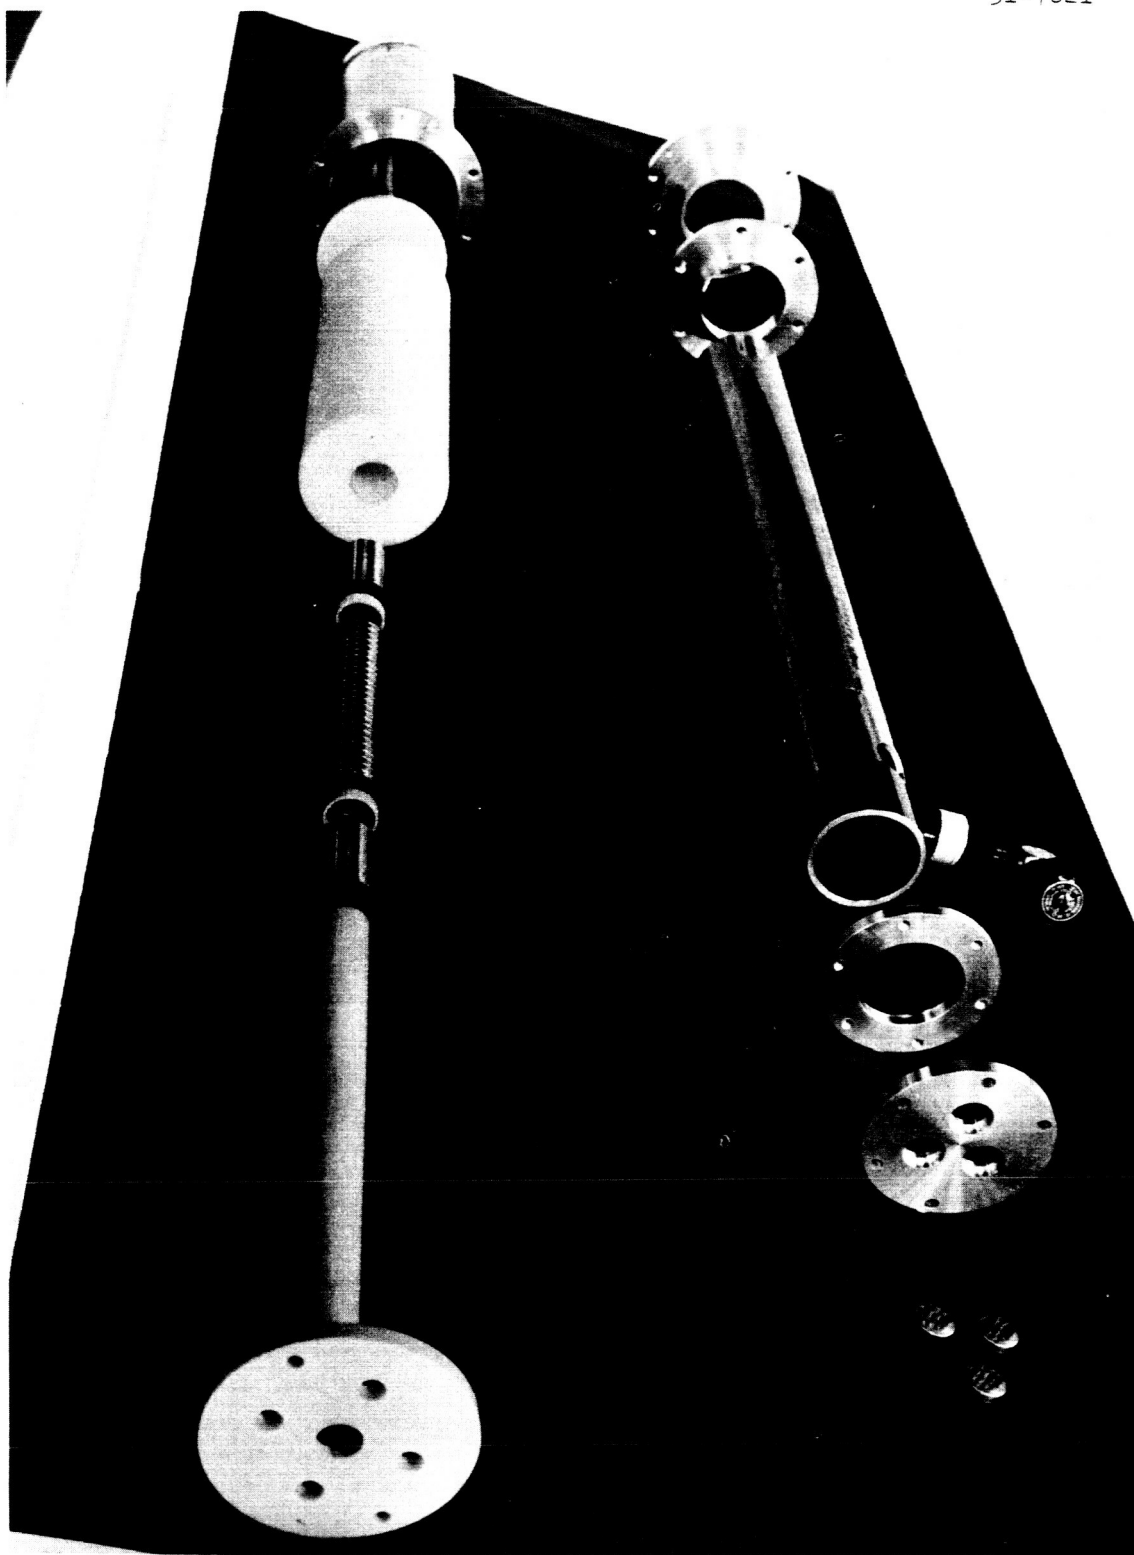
Thermal-Conductivity Tester: Exploded View
